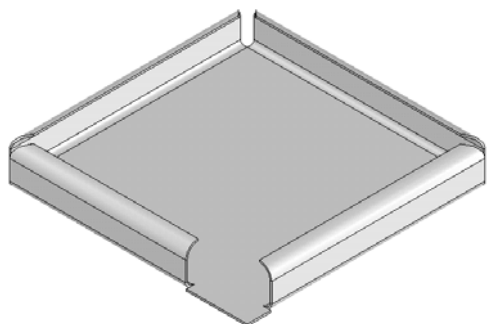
Offset distances applied to the miter flange created by selecting all edges
